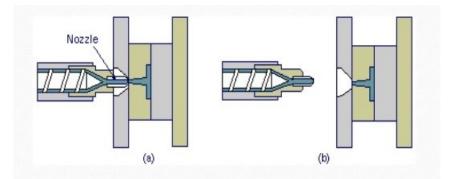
Nozzle with barrel (a) Processing Position (b) Backed out for Purging [2]
